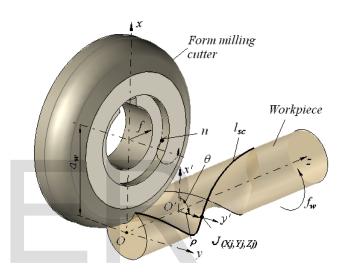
Formation of the profile of the workpiece with a disc milling cutter in a helix line
